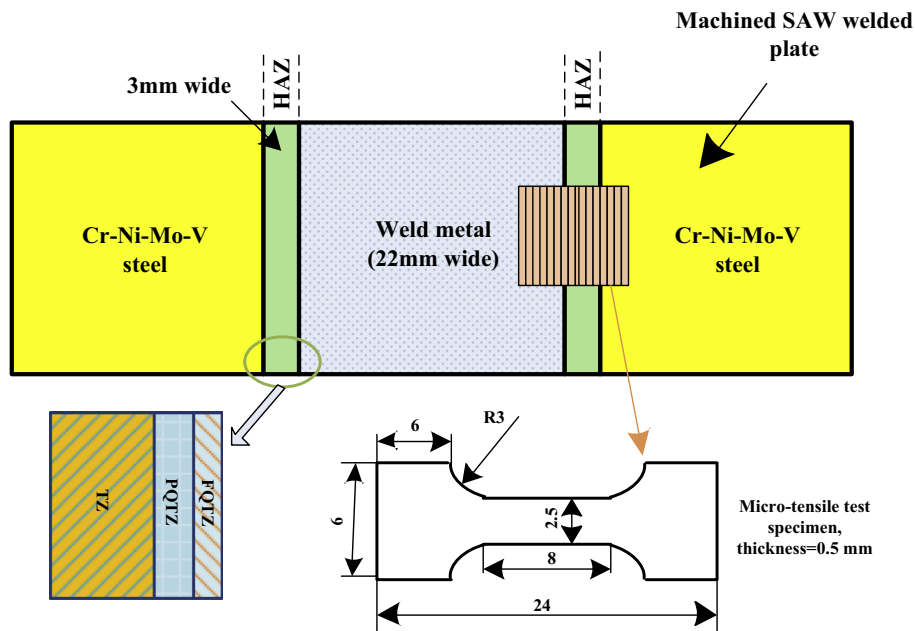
Schematic of the welded joint and micro-tensile test specimens (dimensions in mm).
